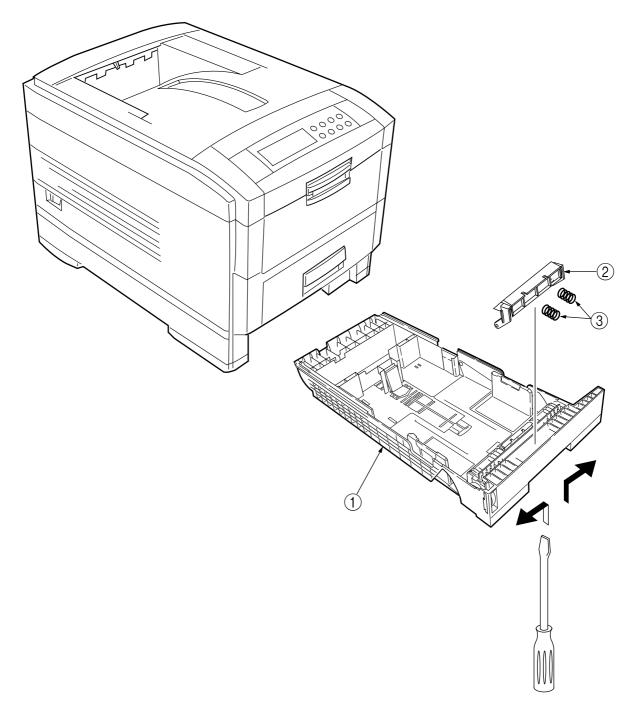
Retard Pad Assy/ Retard Pad Assy Spring
